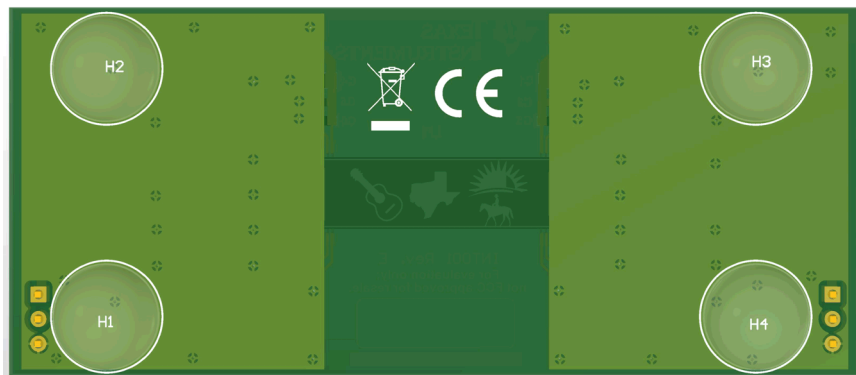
ISO7741UDUWEVM PCB 3D View - Bottom
